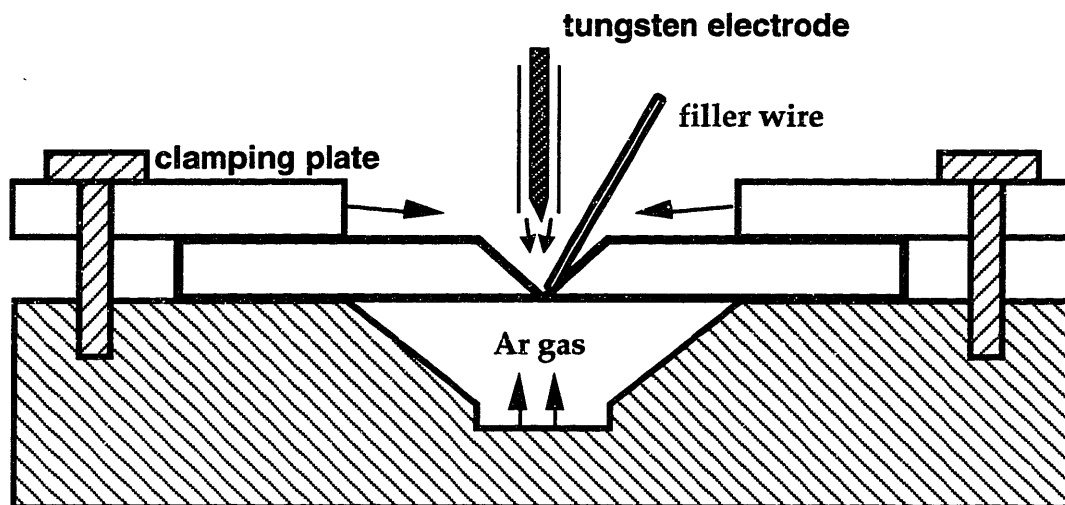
A schematic of the welding fixture. Flow of argon shielding gas was shown as arrows
